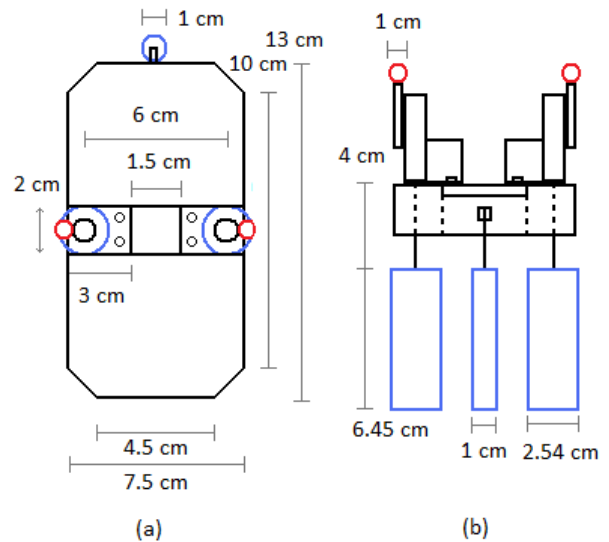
Sketch of second 2-cylinder swimmer: (a) top view and (b) front view
